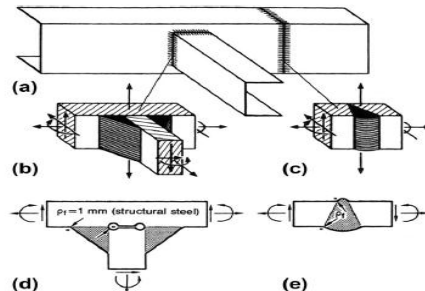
a) Part with welded joints, b), c) close-up of welded joints with internal forces, d), e) modeling of keyhole at the weld root and toe (Radaj et al., 2013)
